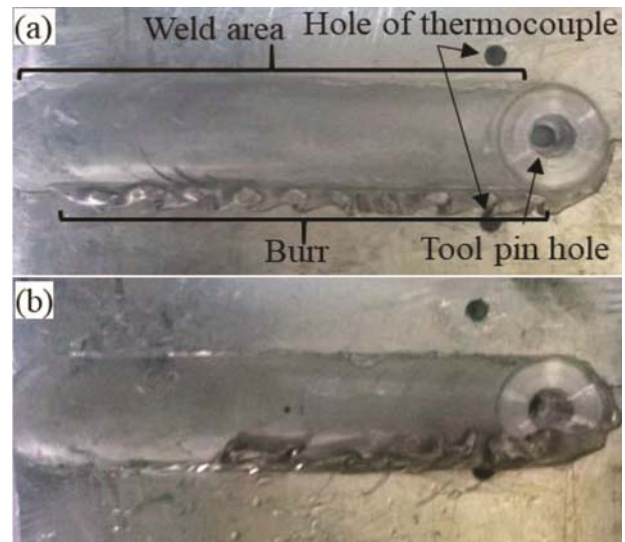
Weld surface of (a) weld 8 and (b) weld 16.
